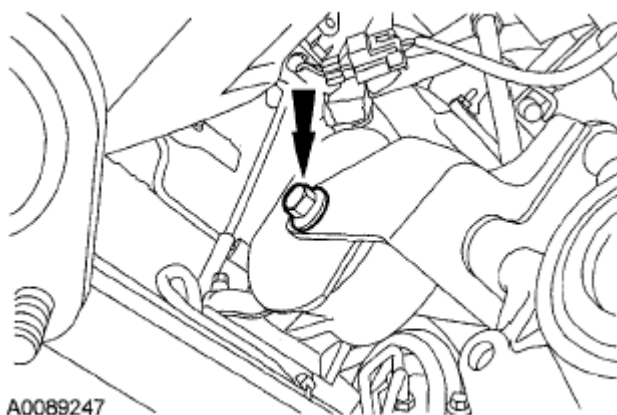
Locating RH Transaxle Support Insulator Through Bolt
